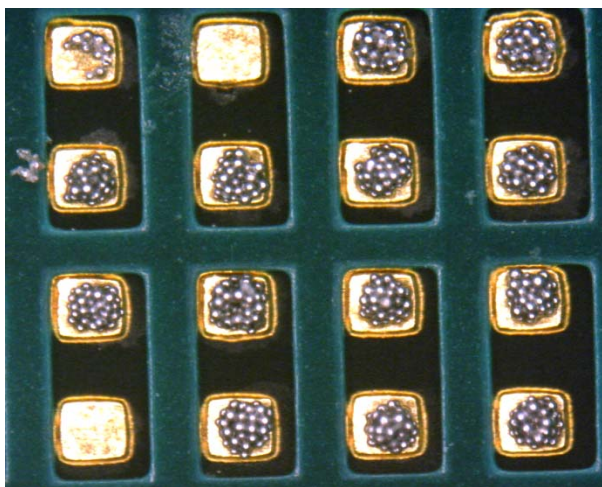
Solder deposition on 01005 pad with Square aperture. Paste type 3 and 3 mil thick
